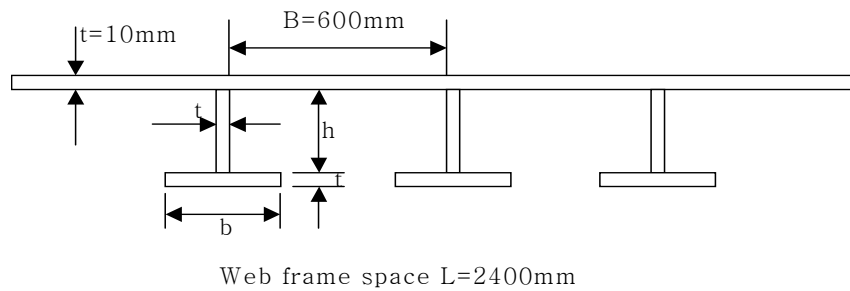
Sectional view of longitudinal stiffeners joined with plate
